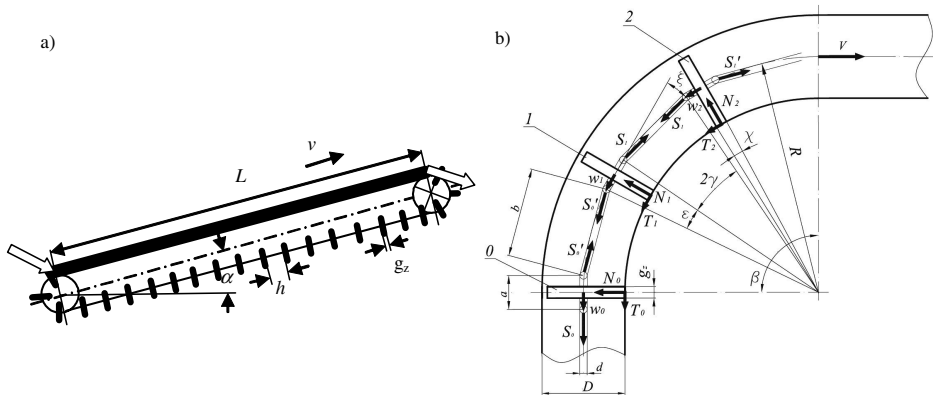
Scraper pipe conveyors used for electrofilters clearing [L. 7]
